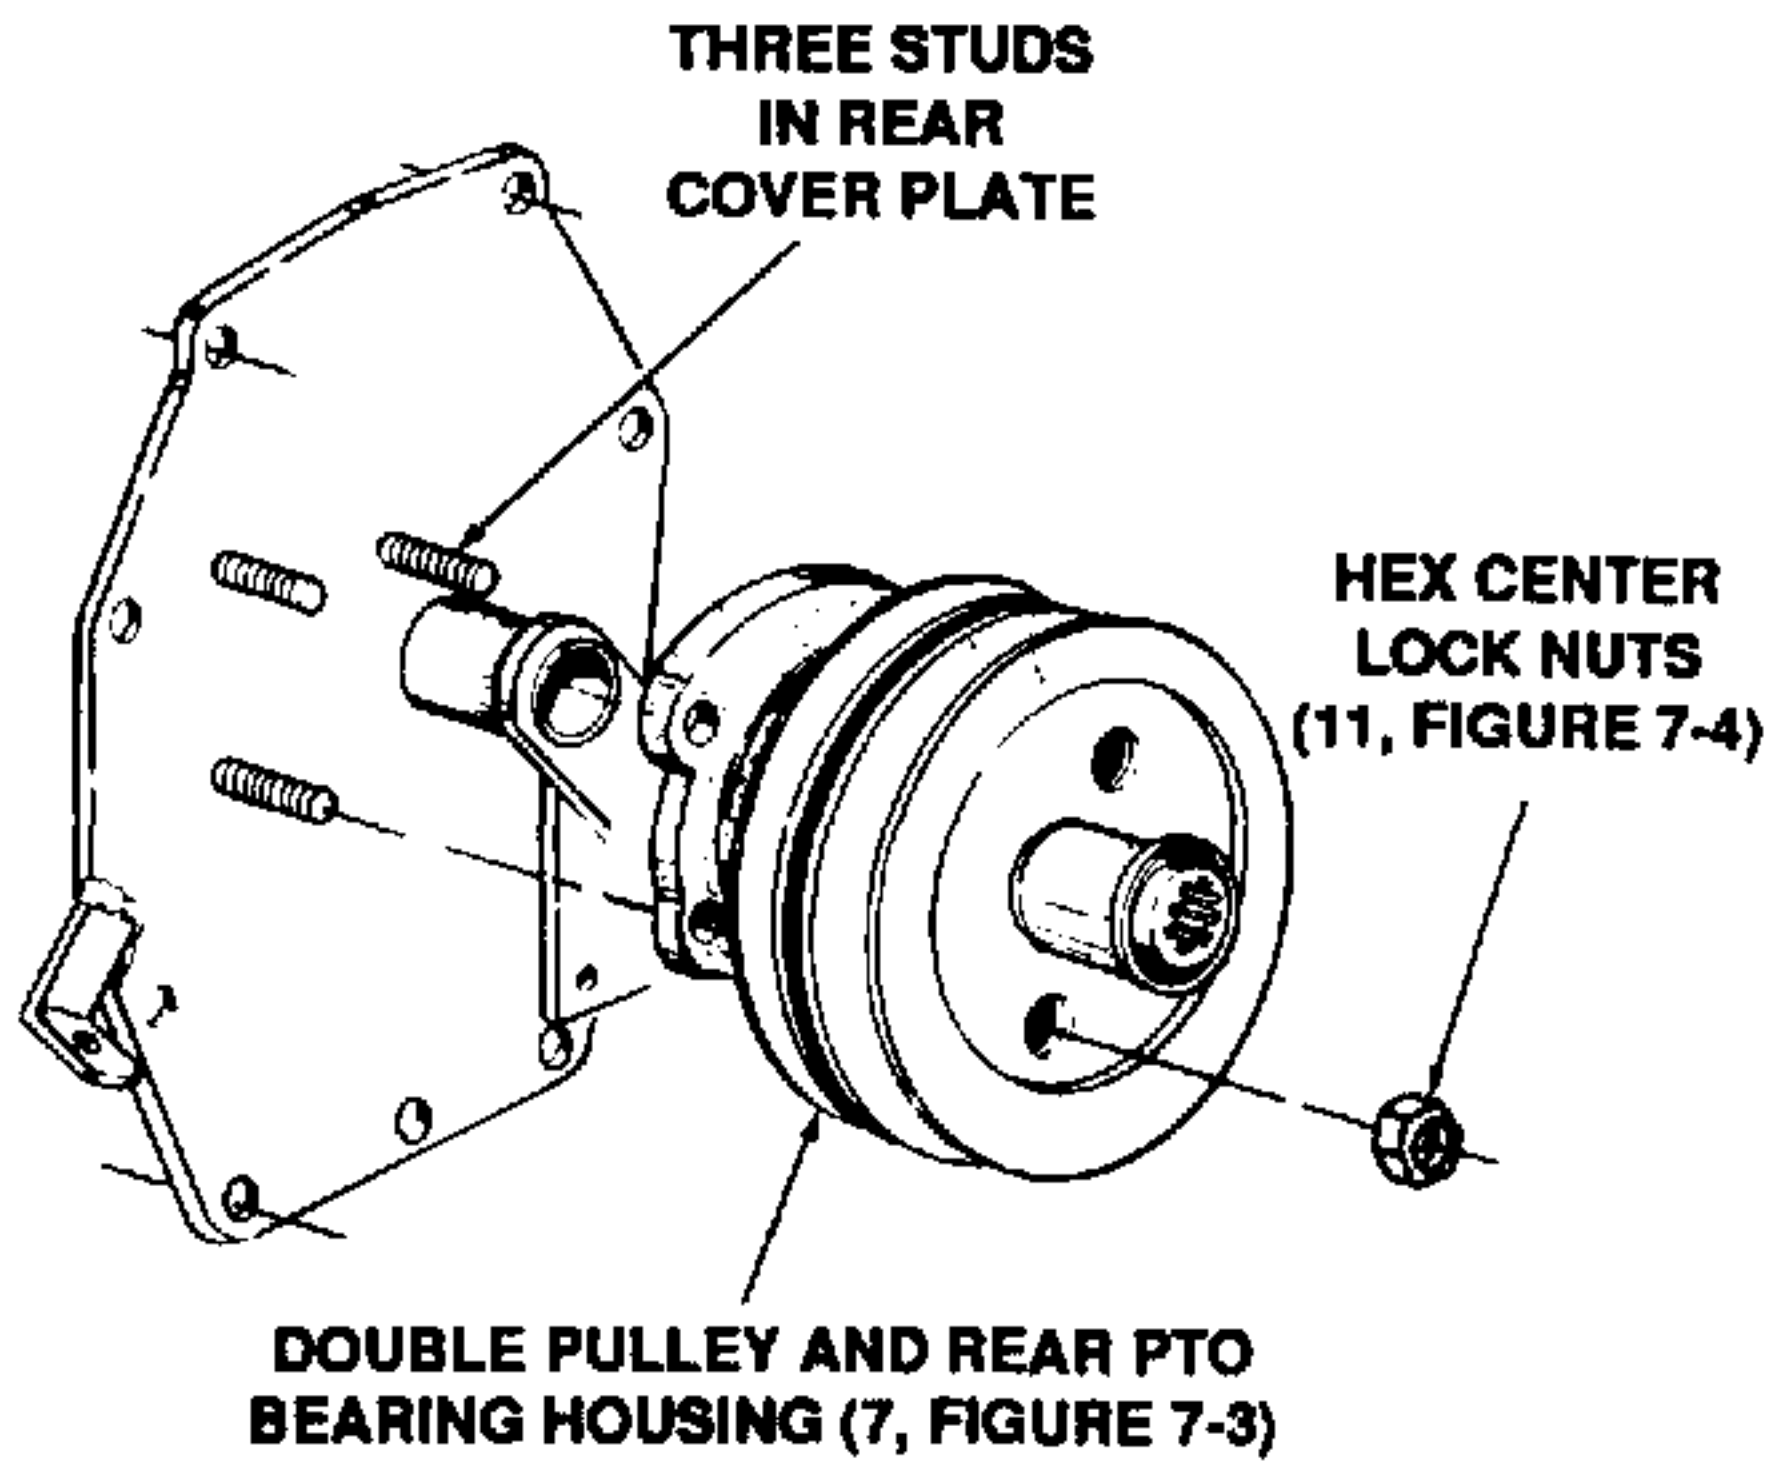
Installing Double Pulley and Rear PTO Bearing Housing.
